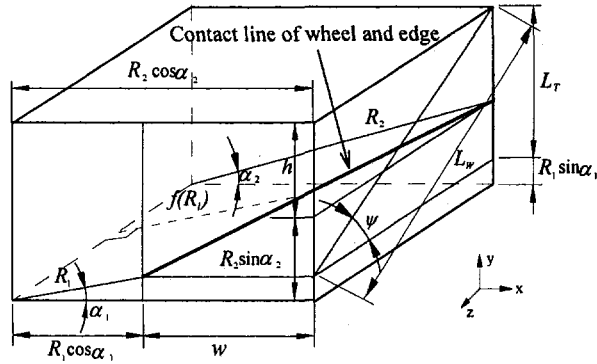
Geometrical relationships between the wheel and the knife edge in the tilted-head spindle grinding method
